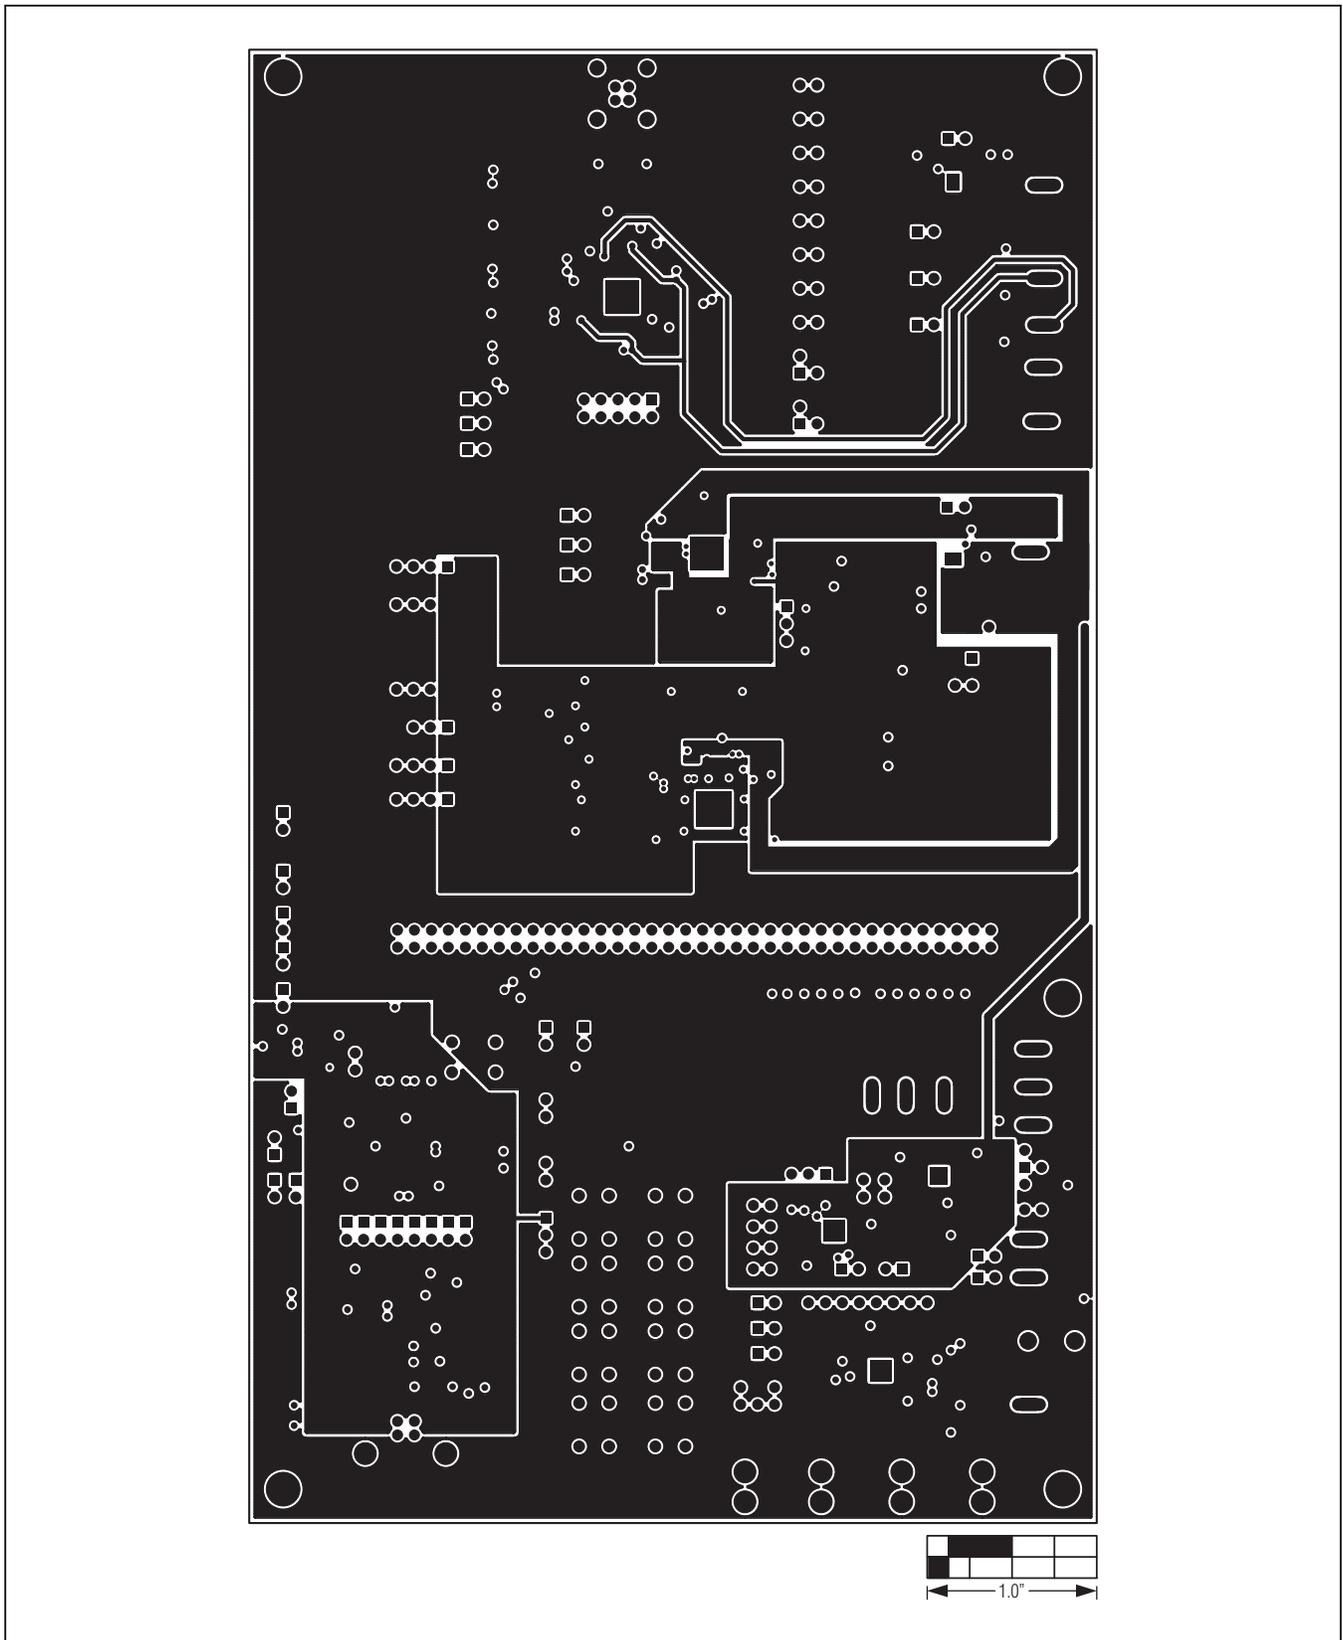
MAX9266 EV Kit PCB Layout—Power Layer 3
